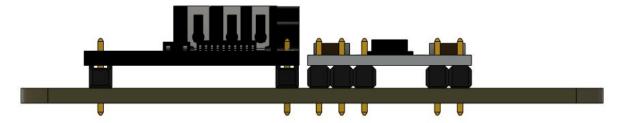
Toby PCB with PCM5102 and PAM8403 soldered. Side view
